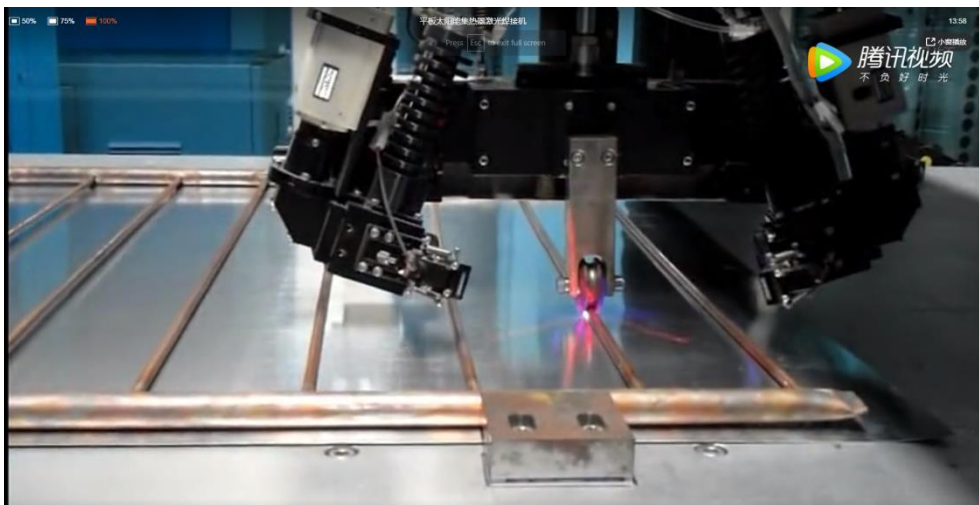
30: Laser welding technology connecting copper tube and absorber [2.136]
